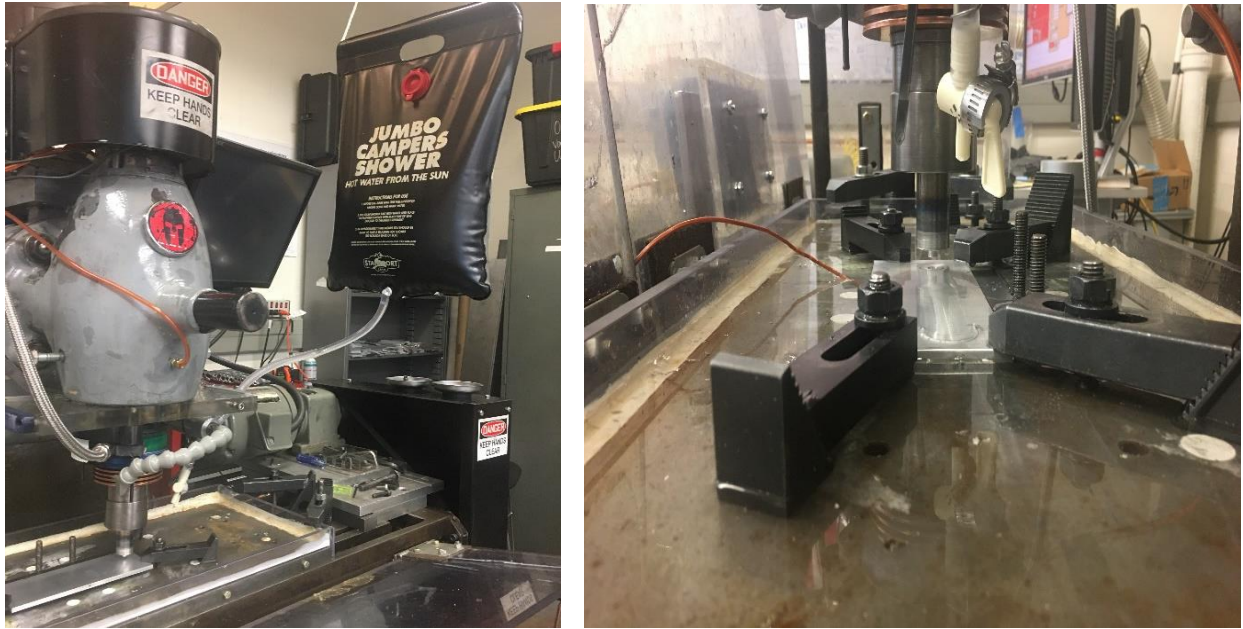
(Left) The Jumbo Campers Shower Bag for WC welding mounted to the exhaust hood. (Right) Post WC weld which shows standing water around the weld, the valve, and the 3D printed valve stopper.
